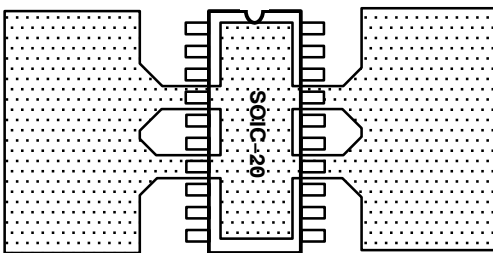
Example of SOIC-20 PCB Ground Plane Layout (preferred layout at top and bottom)
